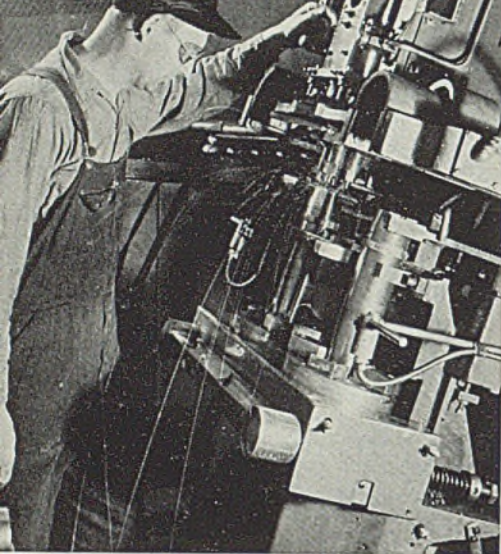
Cover plates are welded to shell base. Two-station fixture slides to speed work
